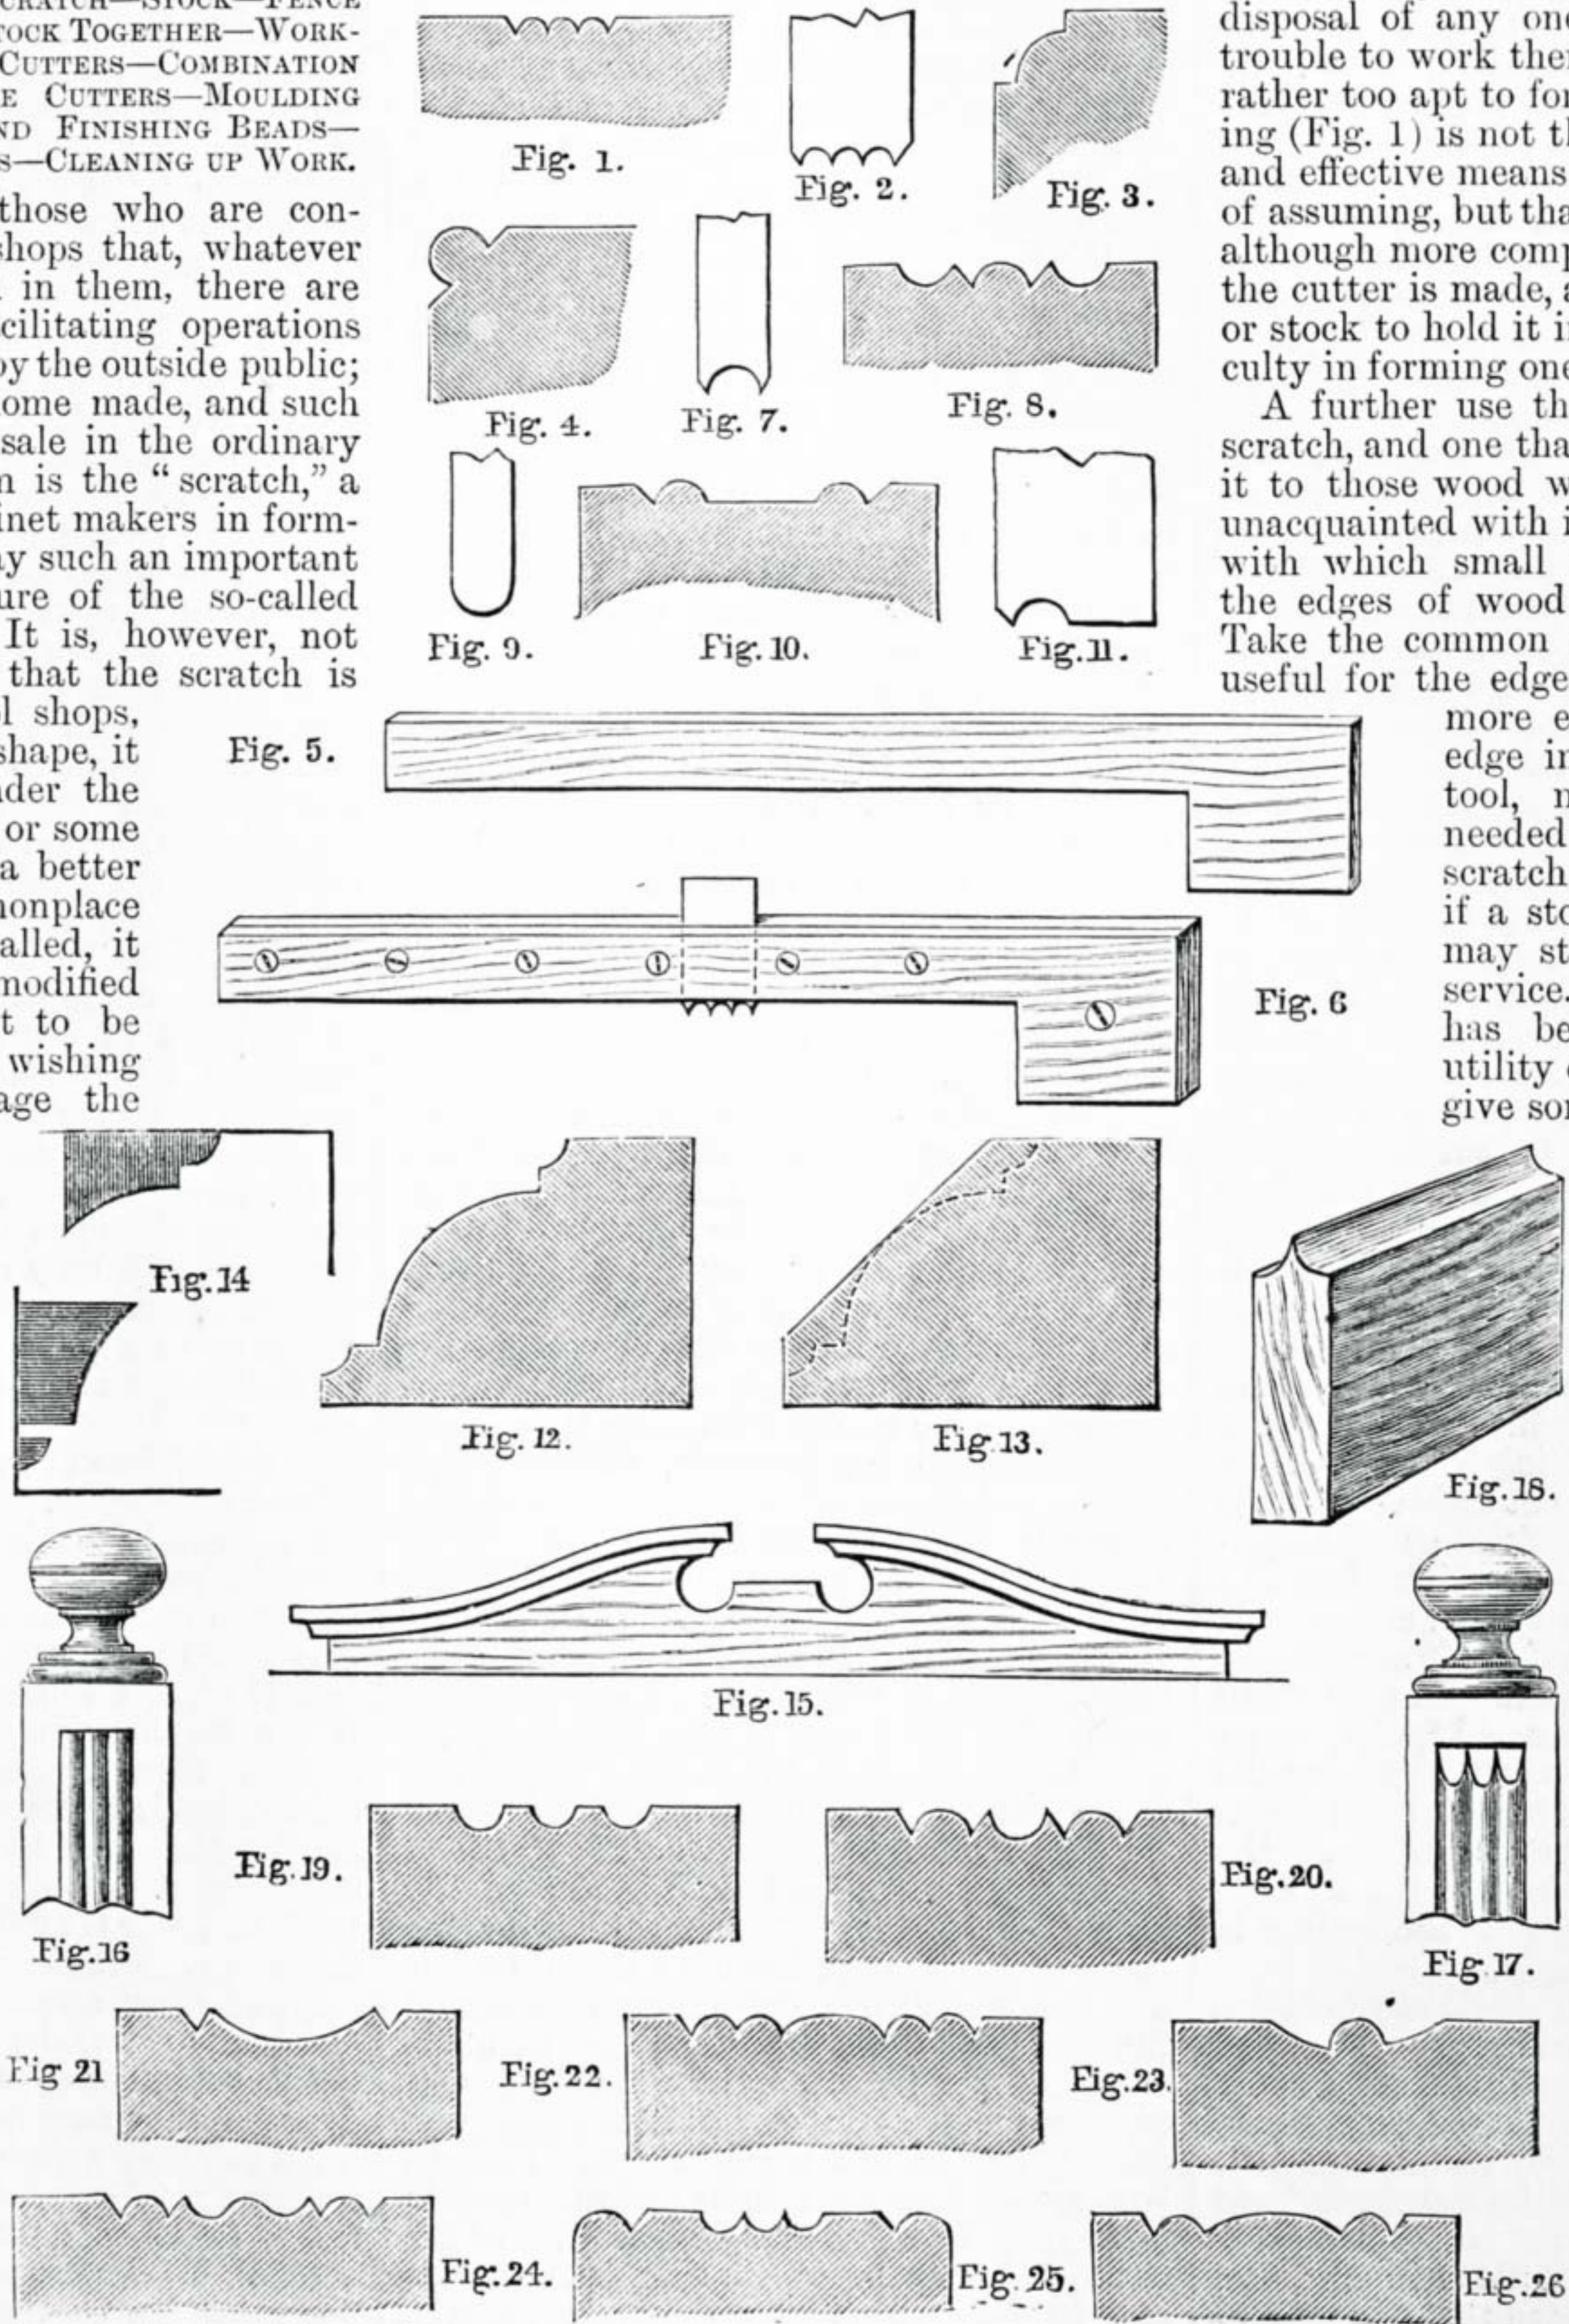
Beads. Fig. 2.—Cutter. Figs. 3, 4.—Moulding on Edges. Fig. 5.—Shape of Stock of Router. Fig. 6.—Scratch or Bead Router Complete. Fig. 7.—Cutter for Bead. Fig. 8.—Bead between Hollows. Fig. 9.—End of Cutter for Hollows. Fig. 10.—Beading with Sunk Flat between. Fig. 11.—Cutter for Fig. 10. Fig. 12.—Moulding. Fig. 13.—Wood prepared for Moulding. Fig. 14.—Position of Cutters for Moulding. Fig. 15.—Curved Moulding on Pediment. Fig. 16.—End of Upright with Knob. Fig. 17.—Alternative Finishing for Beads. Fig. 18.—Piece of Wood for Rubbing between Beads. Figs. 19-26.—Sections for Scratchings.
